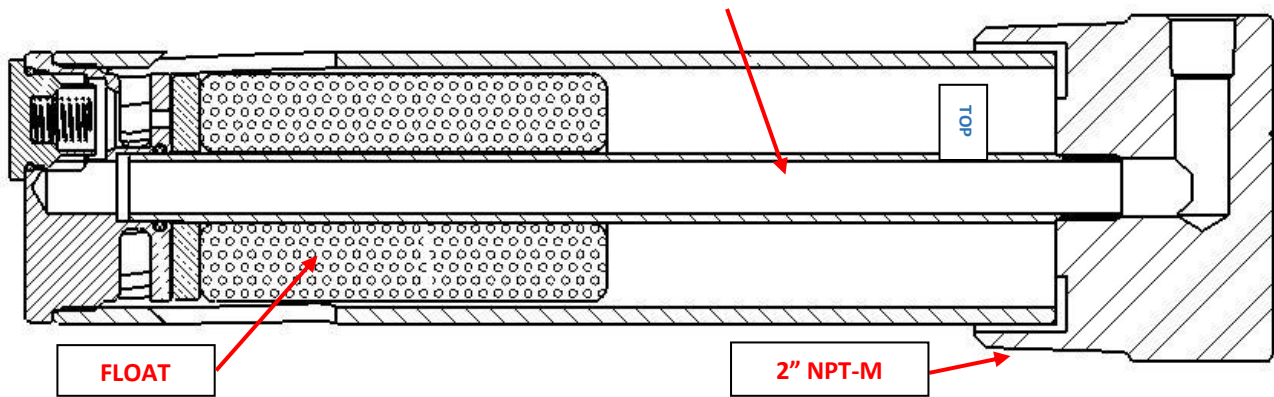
Sectioned View of BLS###B Series (assembly shown laying on side)
